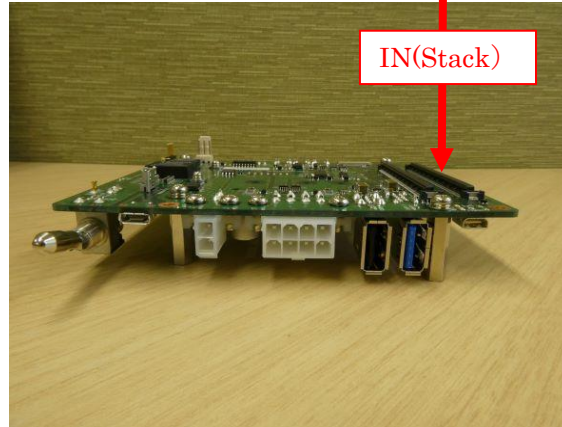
tighten in four places with the included M3 spacers and M3 pan head screws
